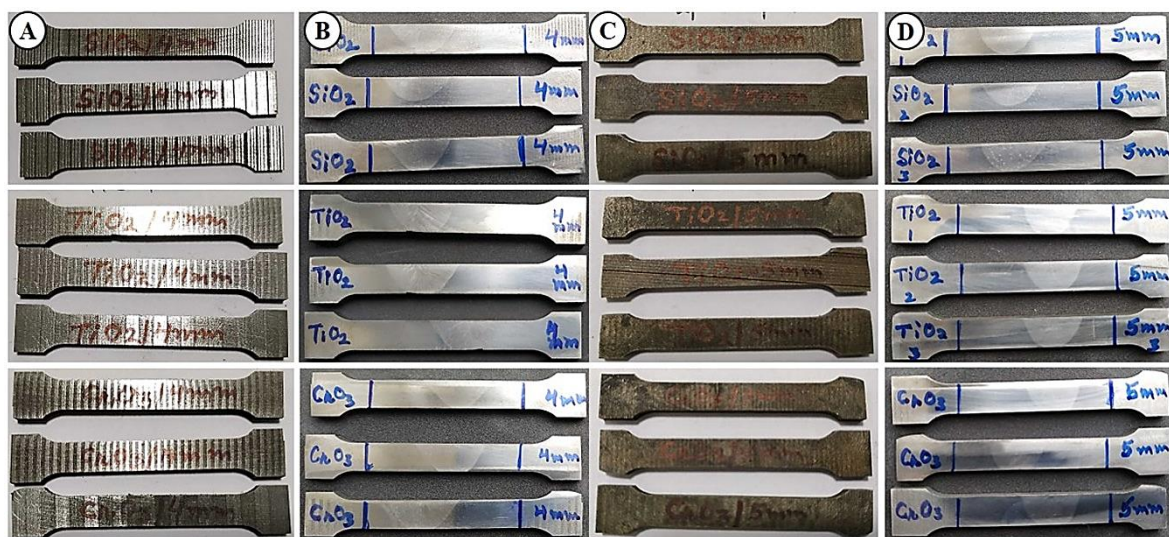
Extracted samples for tensile testing, unpolished and polished (A) and (B) For 4 mm/s welding speed (C) and (D) For 5 mm/s welding speed
